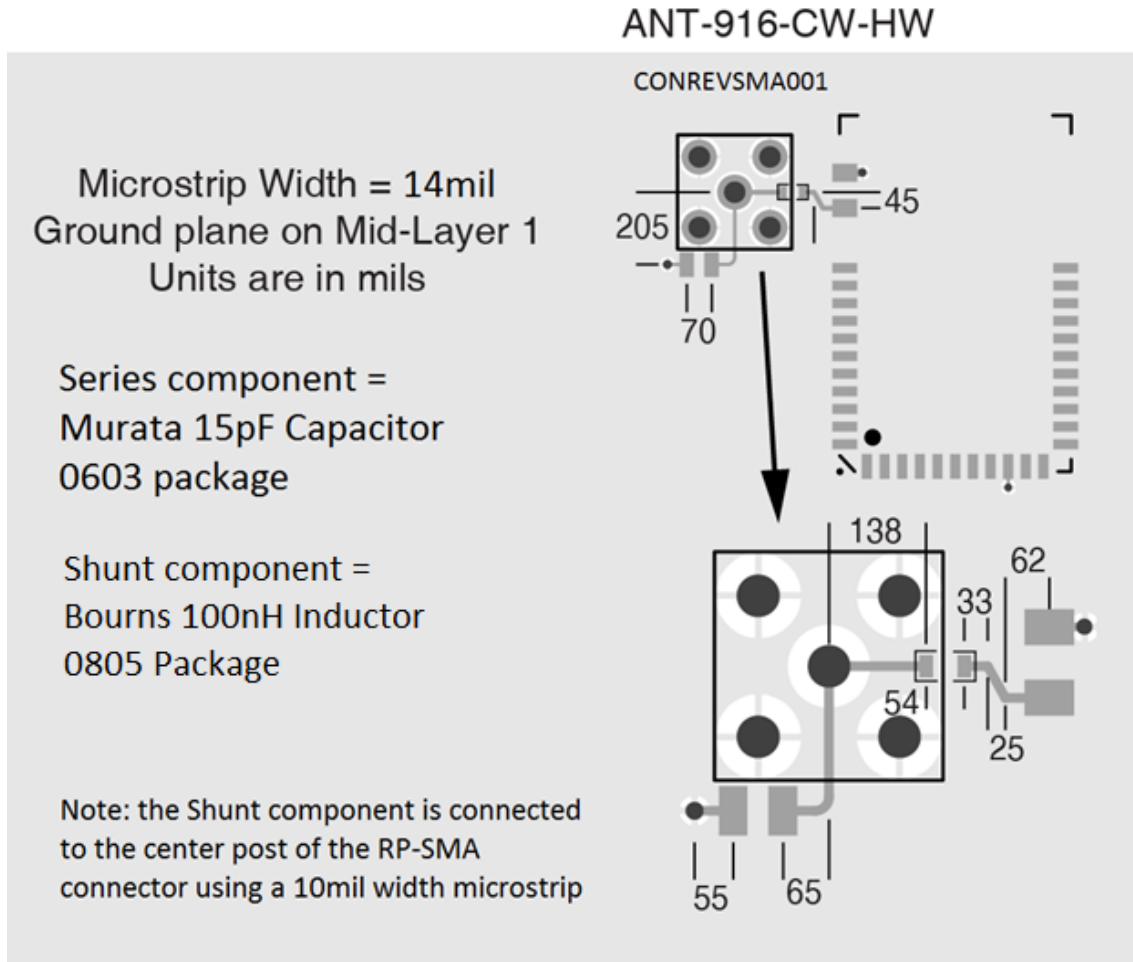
Trace Dimensions and RF Matching Component Placement for Vertical Mount RP-SMA
